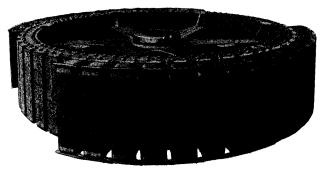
View of Large Laminated Rim Rotor with Part of Poles and Coils Installed.
